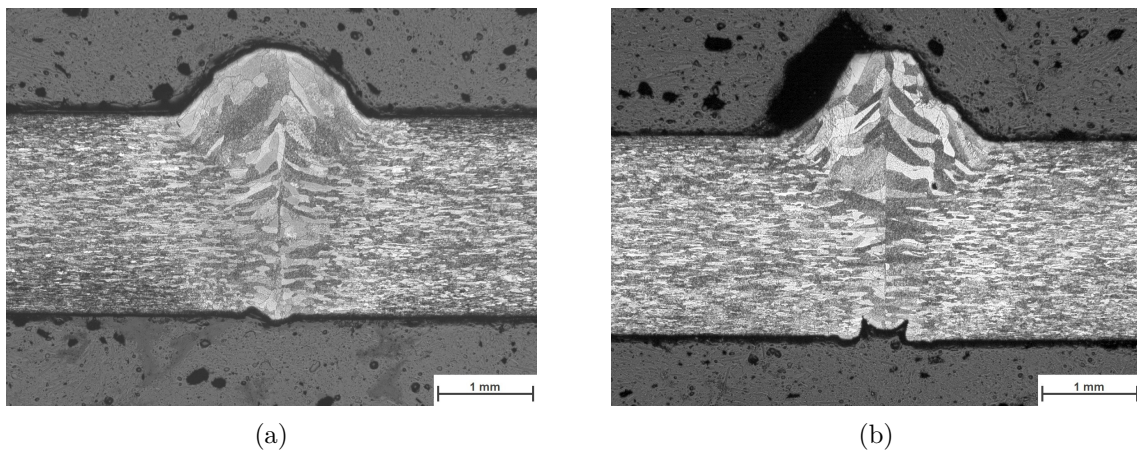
Microsection of (a) V2P2 and (b) V3P2 EB welds of 2 mm TZM sheets with cored wire filler
